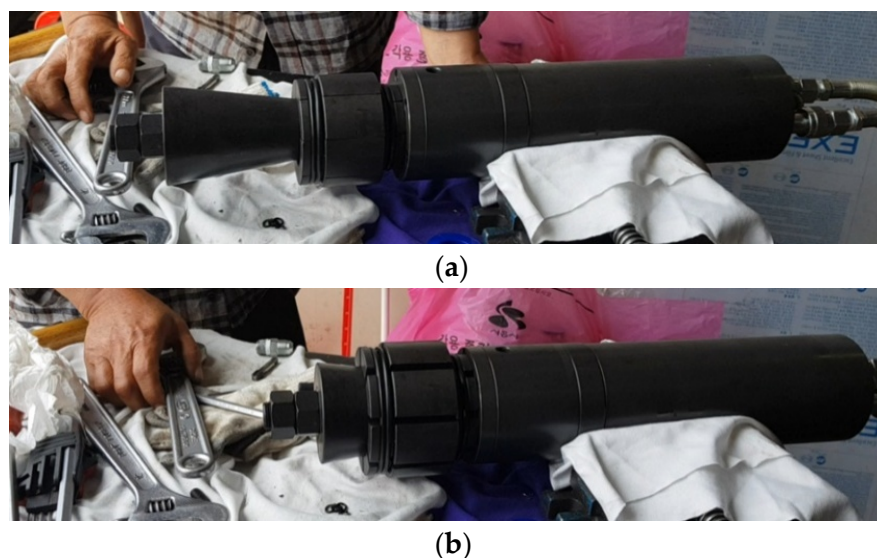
Manufactured prototype of hydraulic expansion equipment: (a) Before expansion of steel pipe; (b) After expansion of steel pipe.
